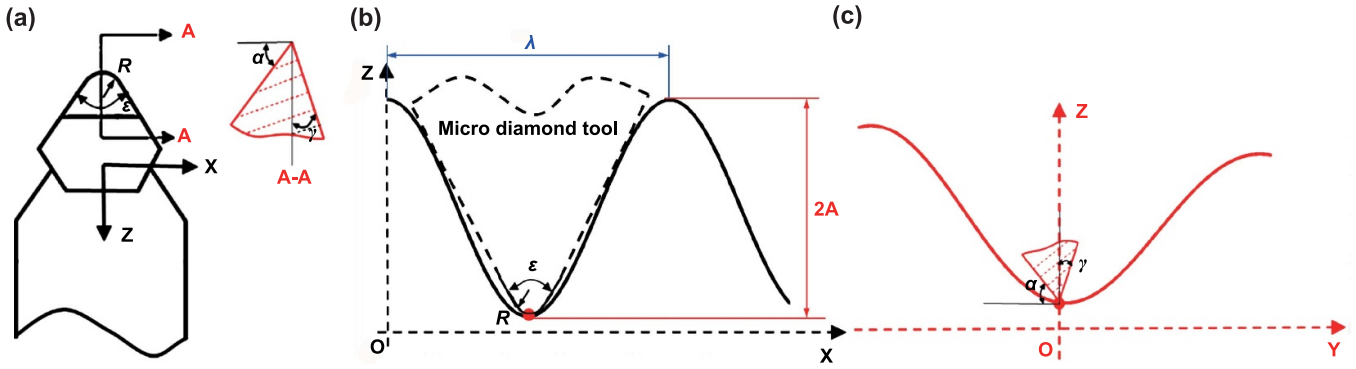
Geometric design of a micro diamond tool with a rounded cutting edge: (a) tool geometries, (b) design of tool nose radius and included angle, (c) design of rake and clearance angles. Reproduced from [35]. CC BY 4.0.
